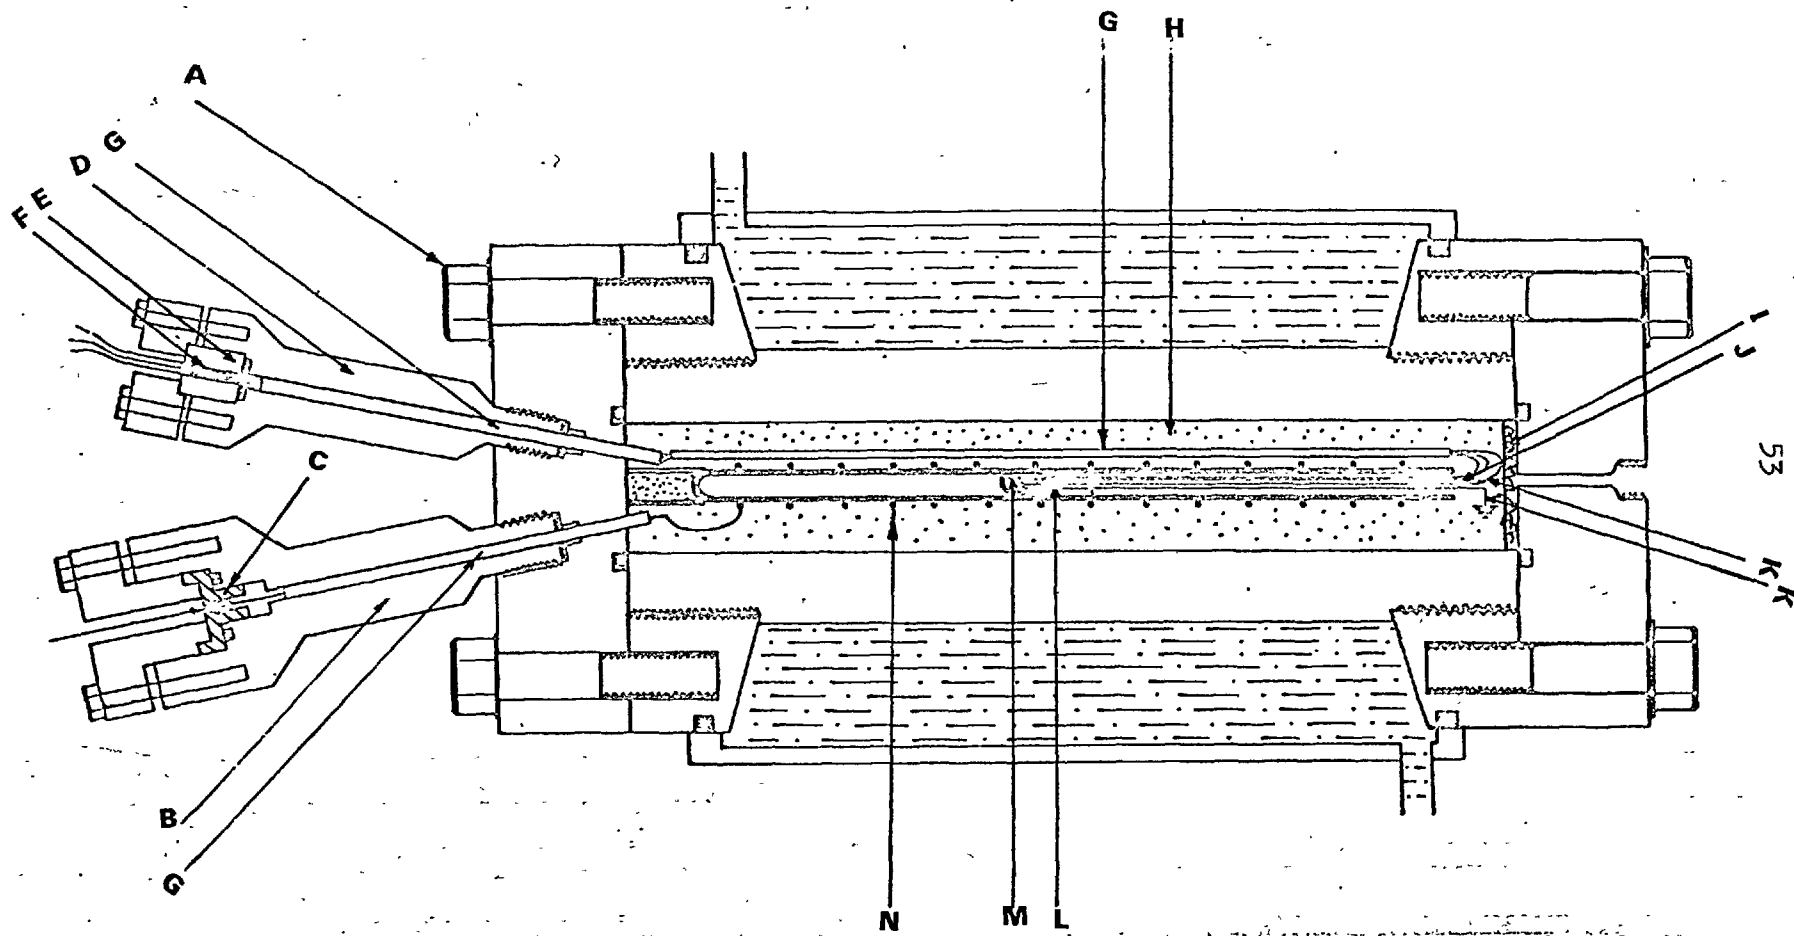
A sectional view of the high pressure vessel and furnace assembly.
